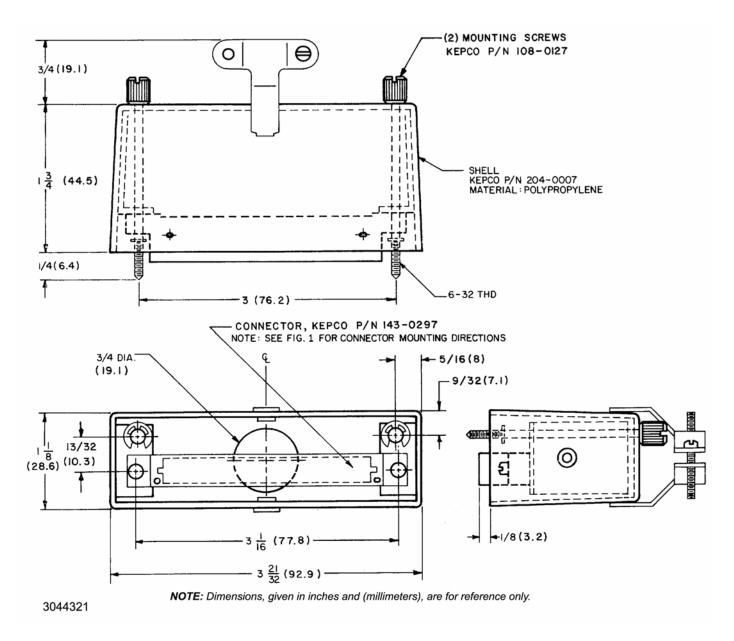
MECHANICAL OUTLINE DRAWING, MODEL PC 12
